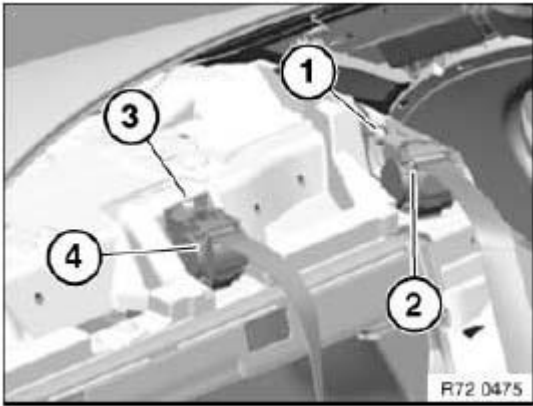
Identifying Screws, Automatic Reel And Bolt
